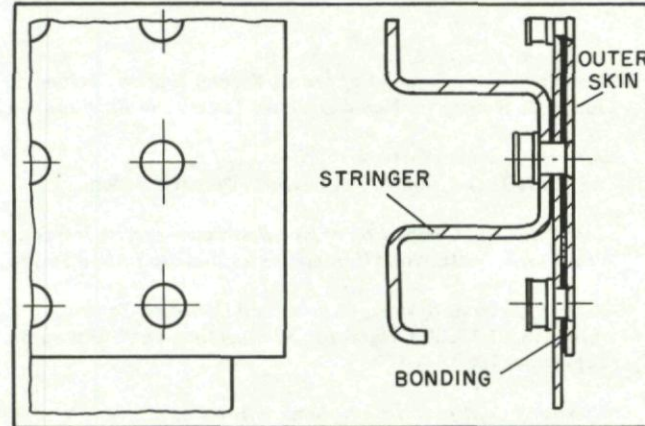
Outer skin lap-joint produced with adhesively bonded sheet of various thicknesses and a riveted stringer (Ref. 5-12)
